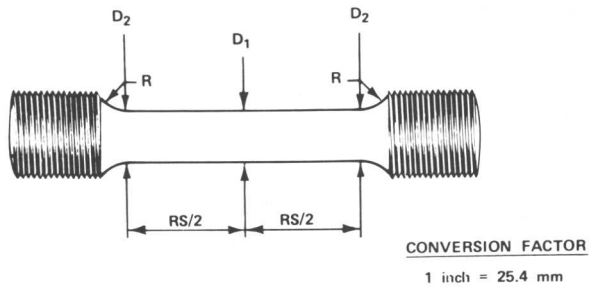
Tension test specimen with welded extensions for through-thickness tensile strength and ductility measurements.
